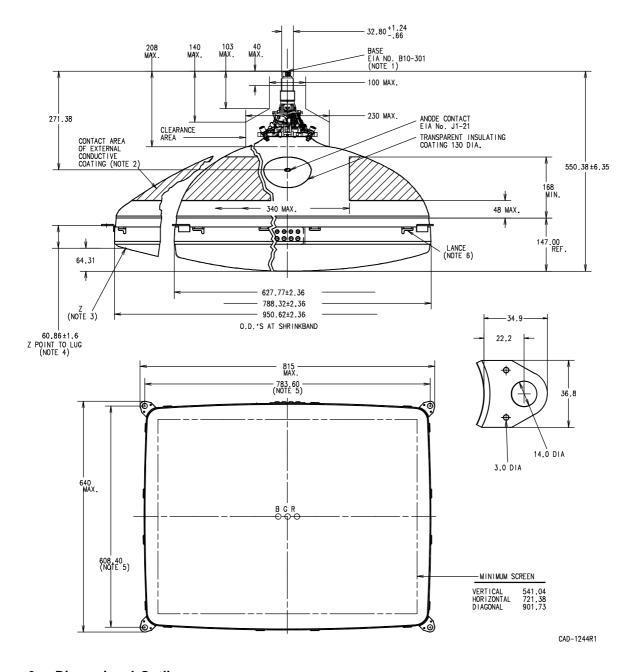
Dimensional Outline (Dimensions in mm unless otherwise noted)
